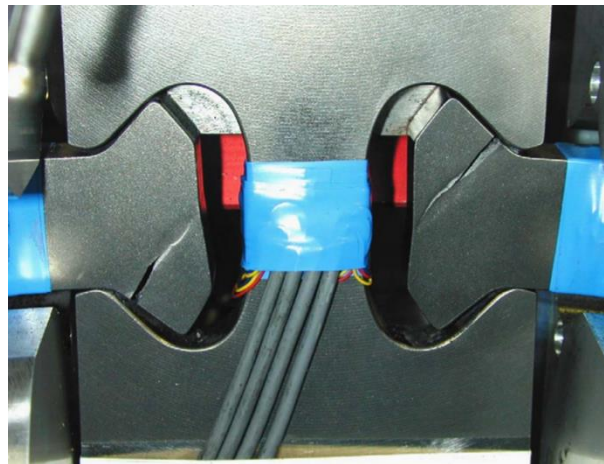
Failure in dovetail joint due to fretting [5]
